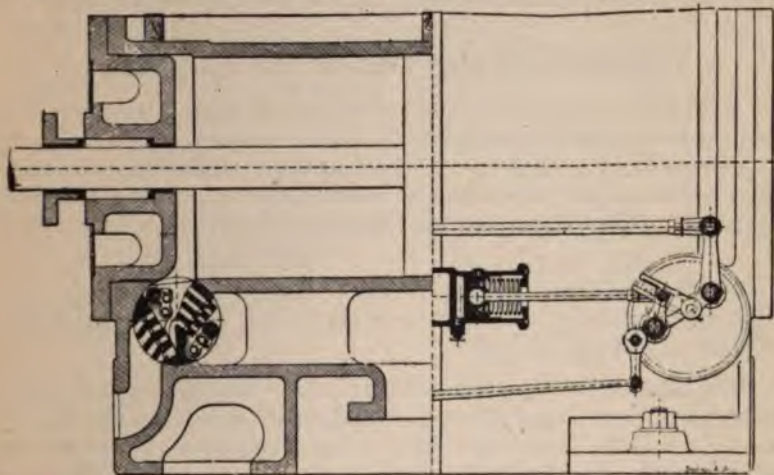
Section of Cylinder of Lancashire Mill Engine, with "Wheellock" Valves. The Valve is seen in section below the Cylinder, on the left. It controls the entry and exit of the Steam, and is claimed to combine the advantages of the Slide and Corliss Valves. The Expansion Gear is shown on the right.
